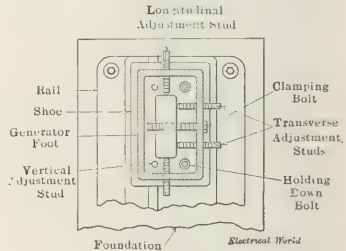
PLAN OF SHOE AND RAIL-ADJUSTING ARRANGEMENT
